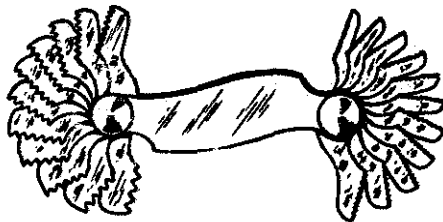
A screw pitch gauge to measure external or internal threads per inch.
